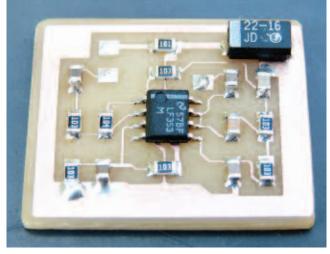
The finished amplifier PCB, built entirely of surface mount devices.
